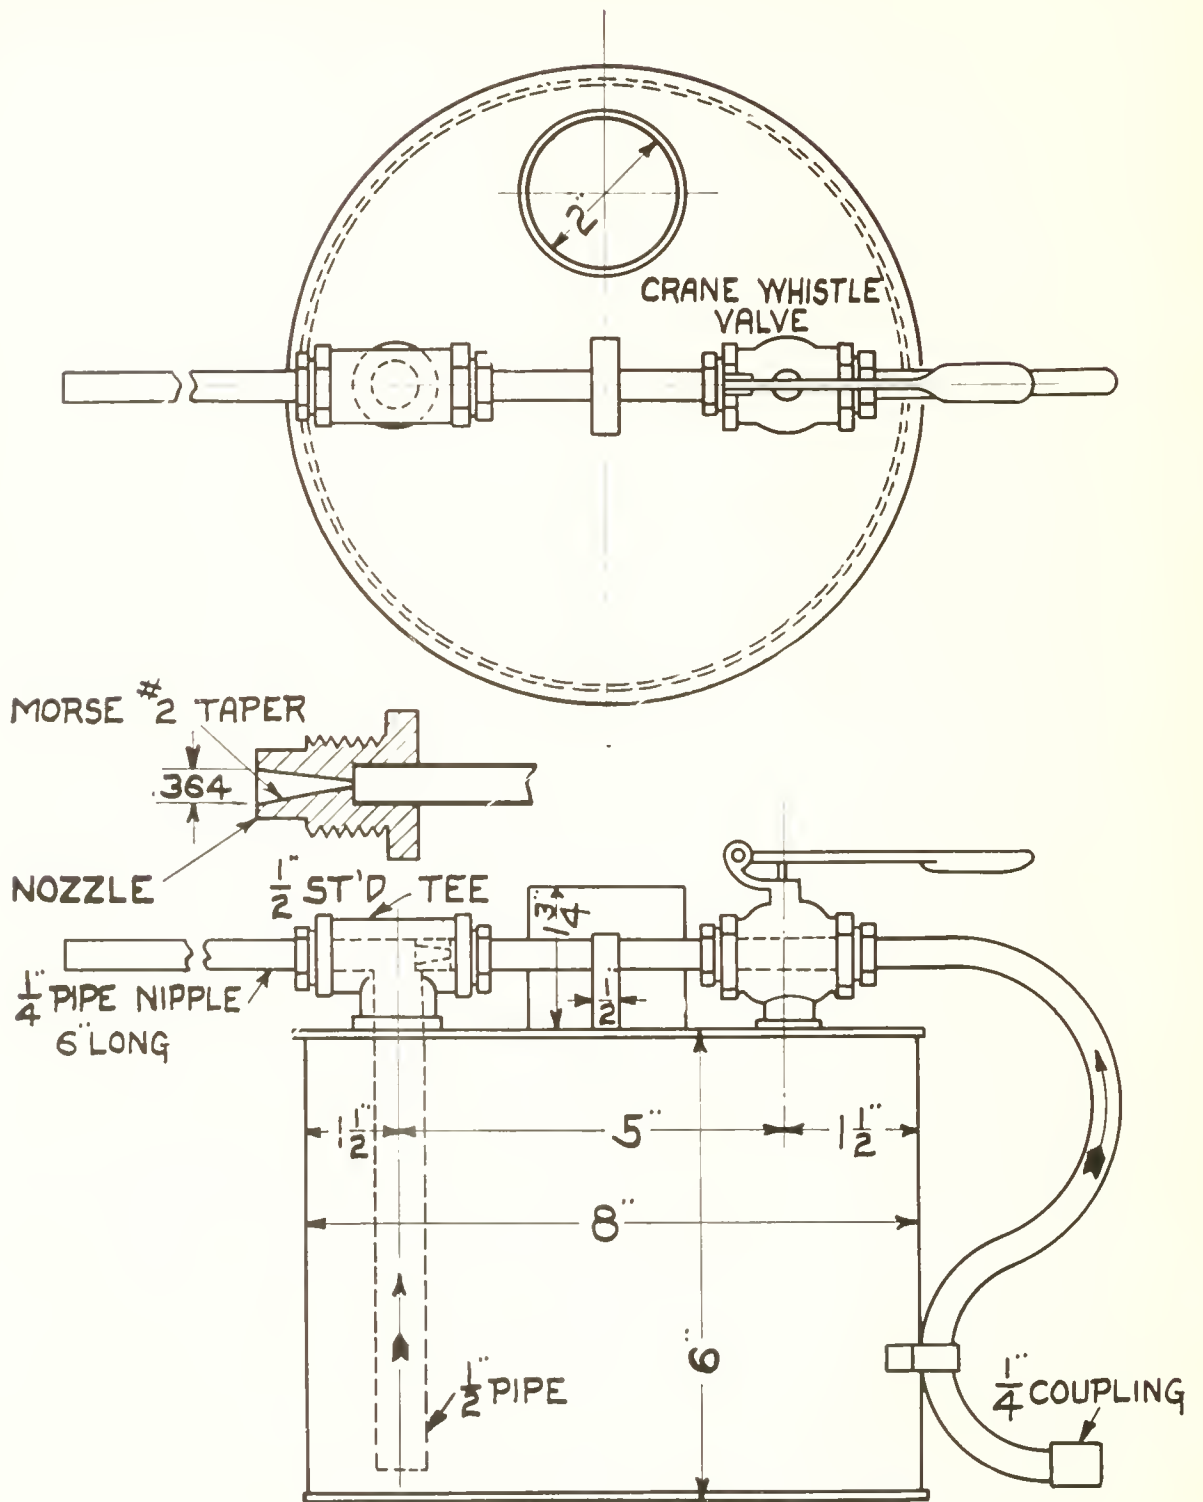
Sand Blast Pot Made by Arc Welding.
